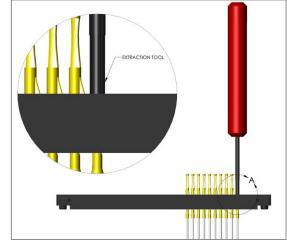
Figure C. Ensure that the tool is kept perpendicular to the module face to avoid damage to the contact or tool.
